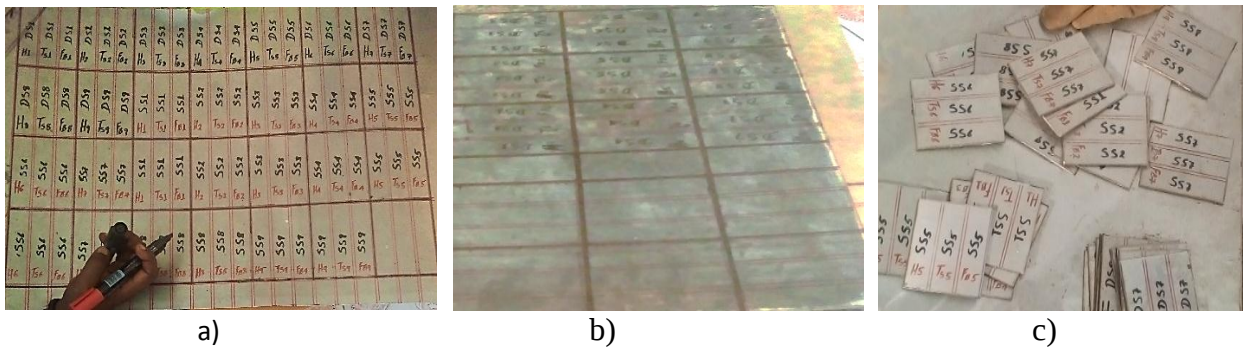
specimen preparation: a) stainless steel, b) mild steel, c) after shear cutting
